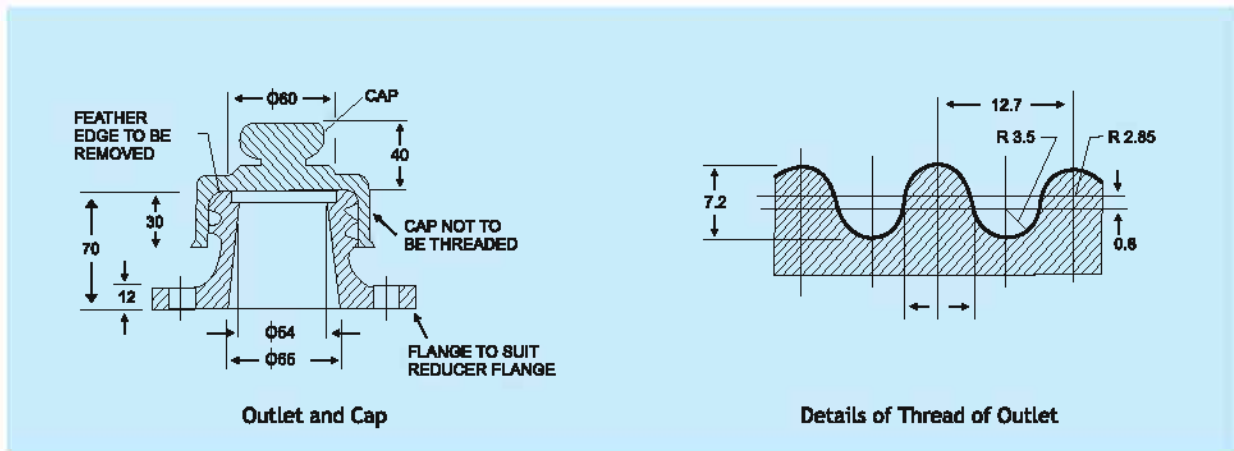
Screwed Outlet and Cap (Round Thread)
